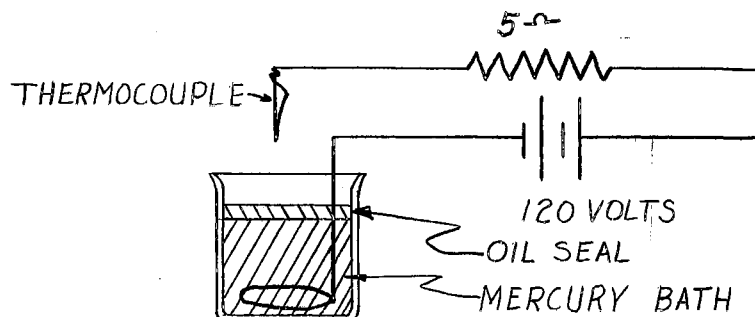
A Method of Welding Small Conductor Thermocouples.
